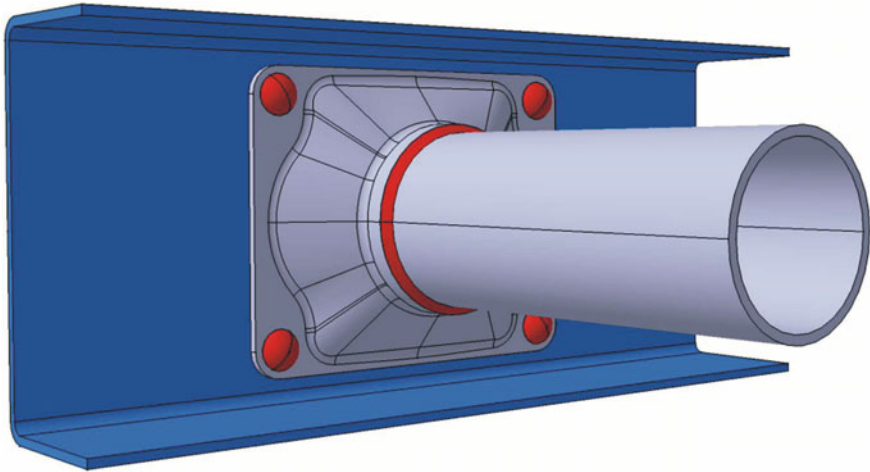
Connection between a pipe cross beam and a longitudinal member using HUCK bolts
